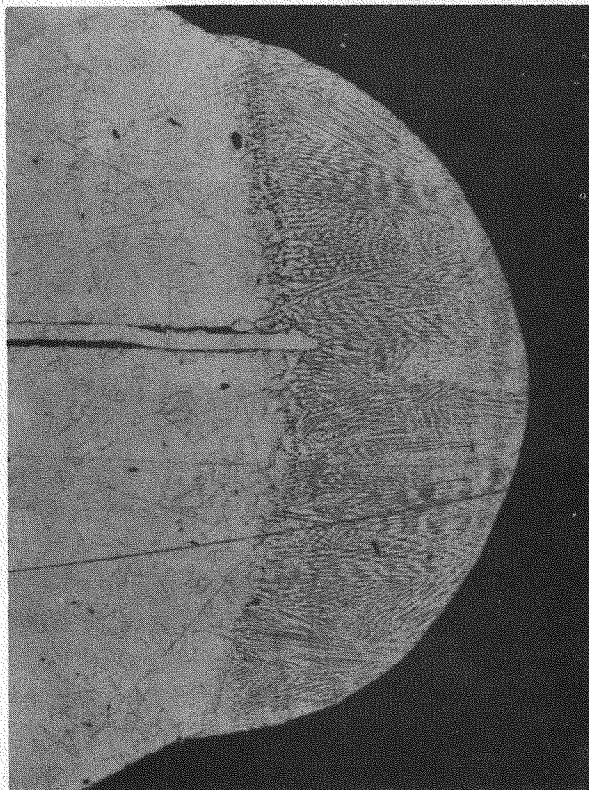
WELD SECTION OF BURSTING DISC ASSEMBLY X125
